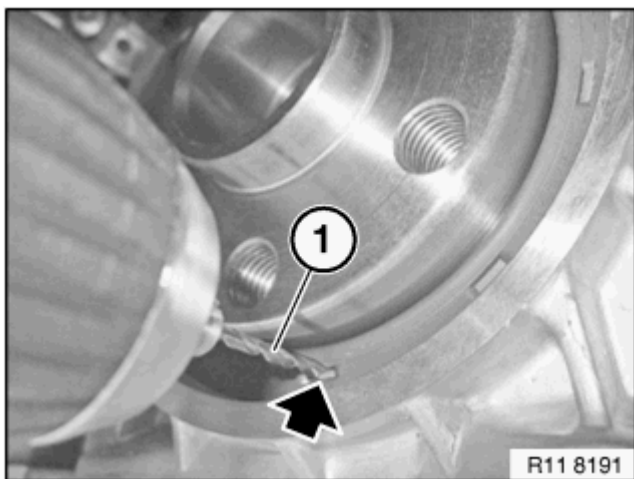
Drilling Hole In Radial Shaft Seal Using Drill
